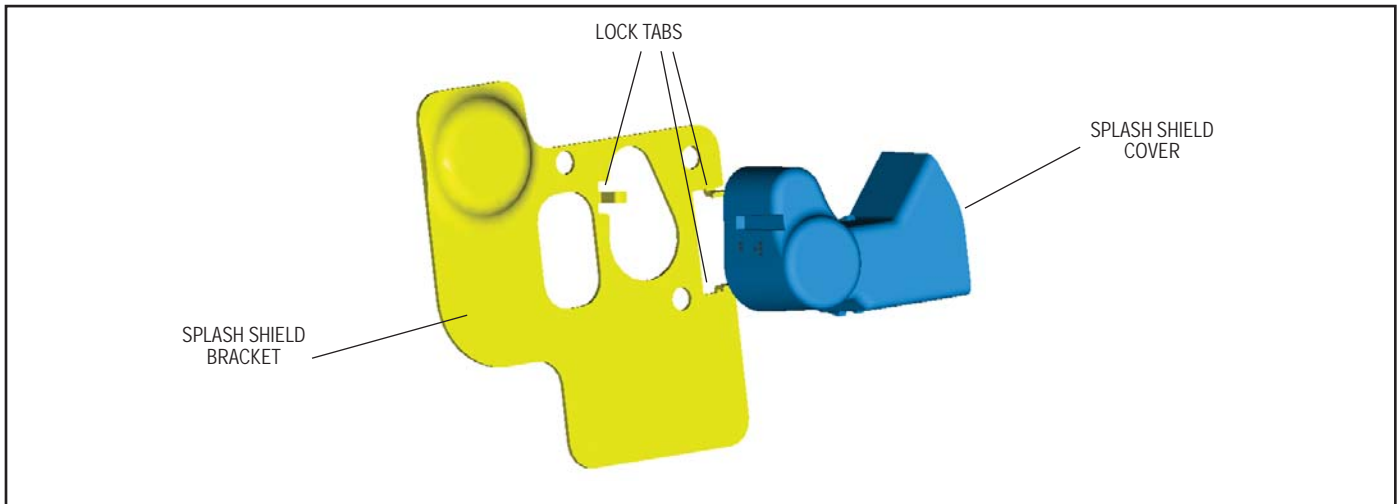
SPLASH SHIELD BRACKET AND COVER - (EXPLODED VIEW)
